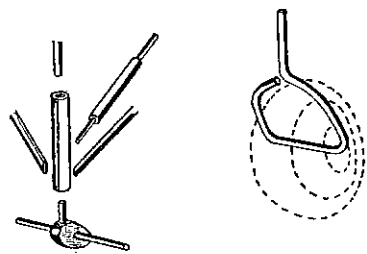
Twin nose-wheel assembly with bracing struts and retracting jack.
